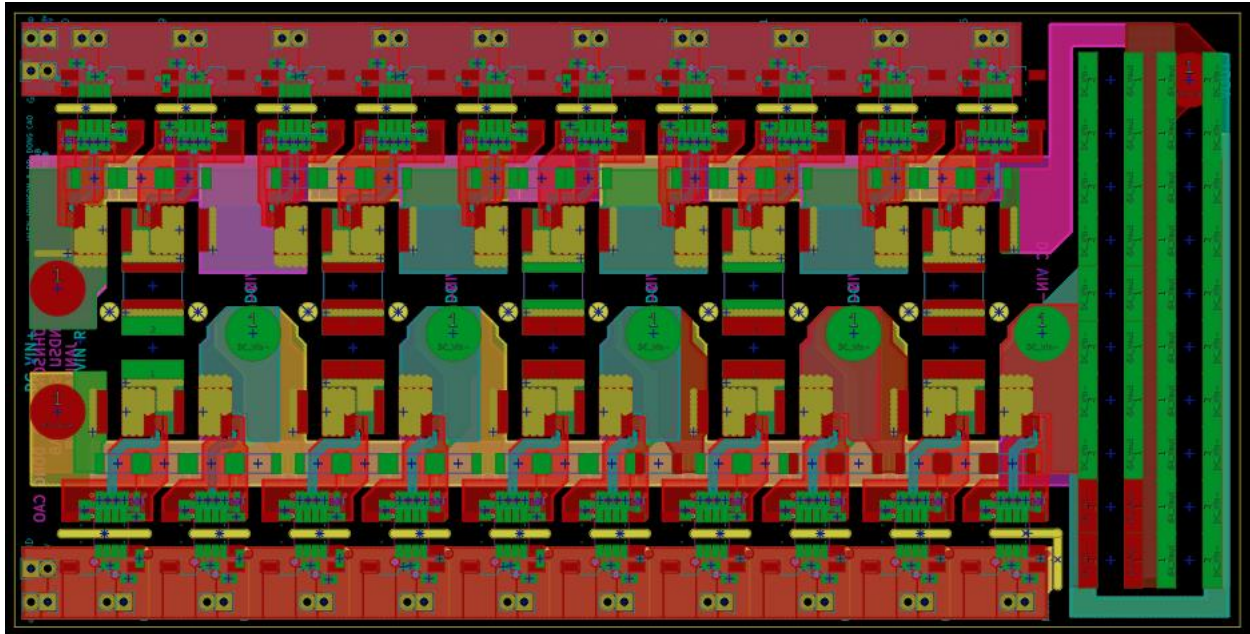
RMMC PCB Layout with 6 Copper Layers Shown
